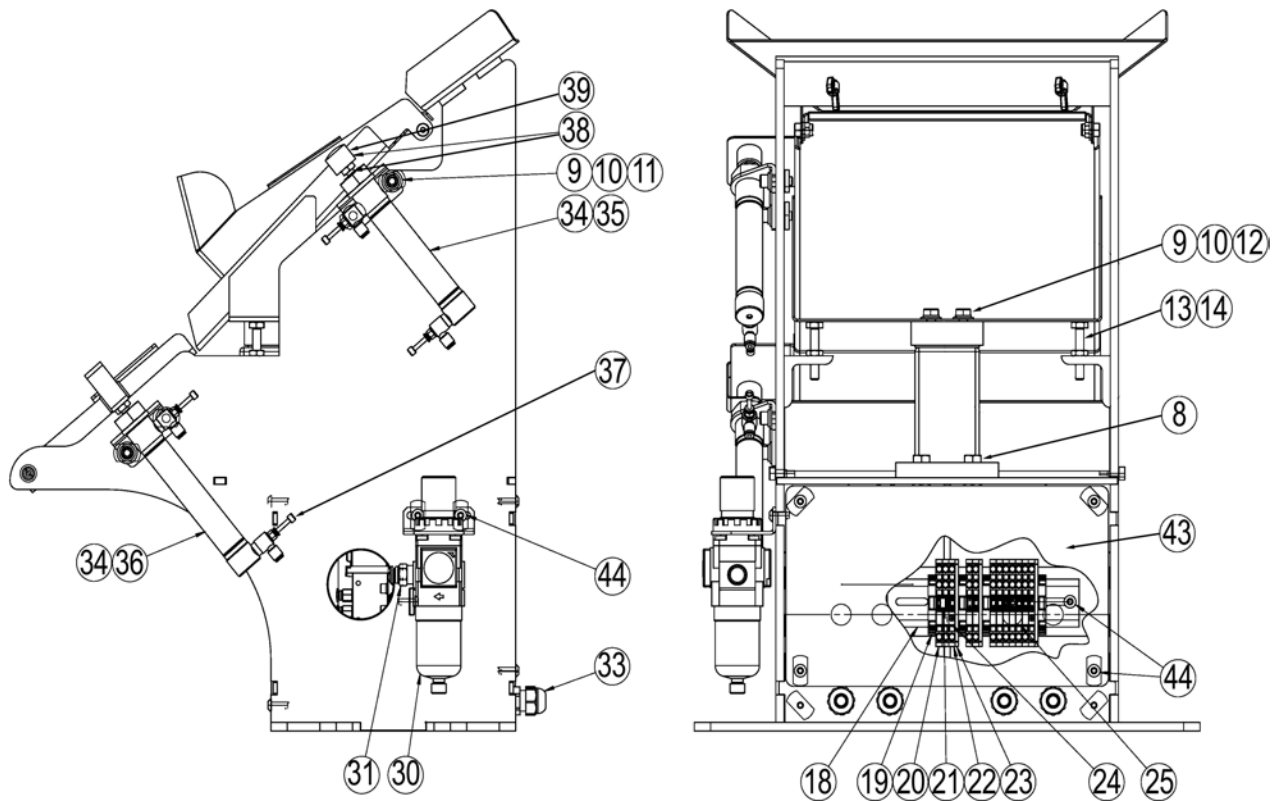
Cascade Scale Assembly, Painted Mild Steel, Continued
